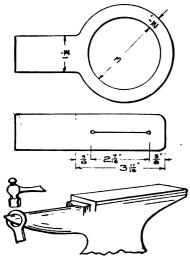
FORMING WELDLESS RINGS BY SPLITTING.
